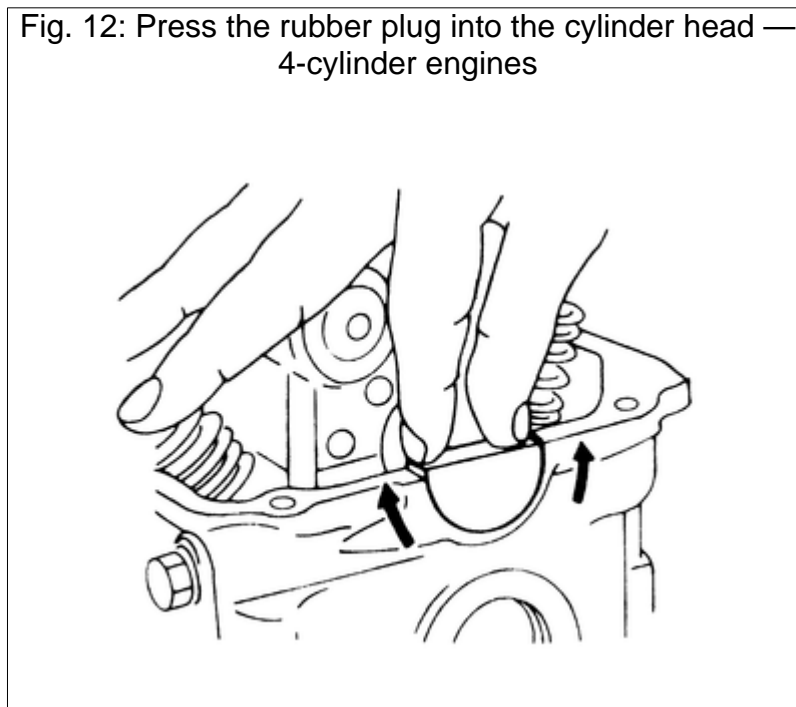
Cylinder head plug positioning — 4-cylinder engines
